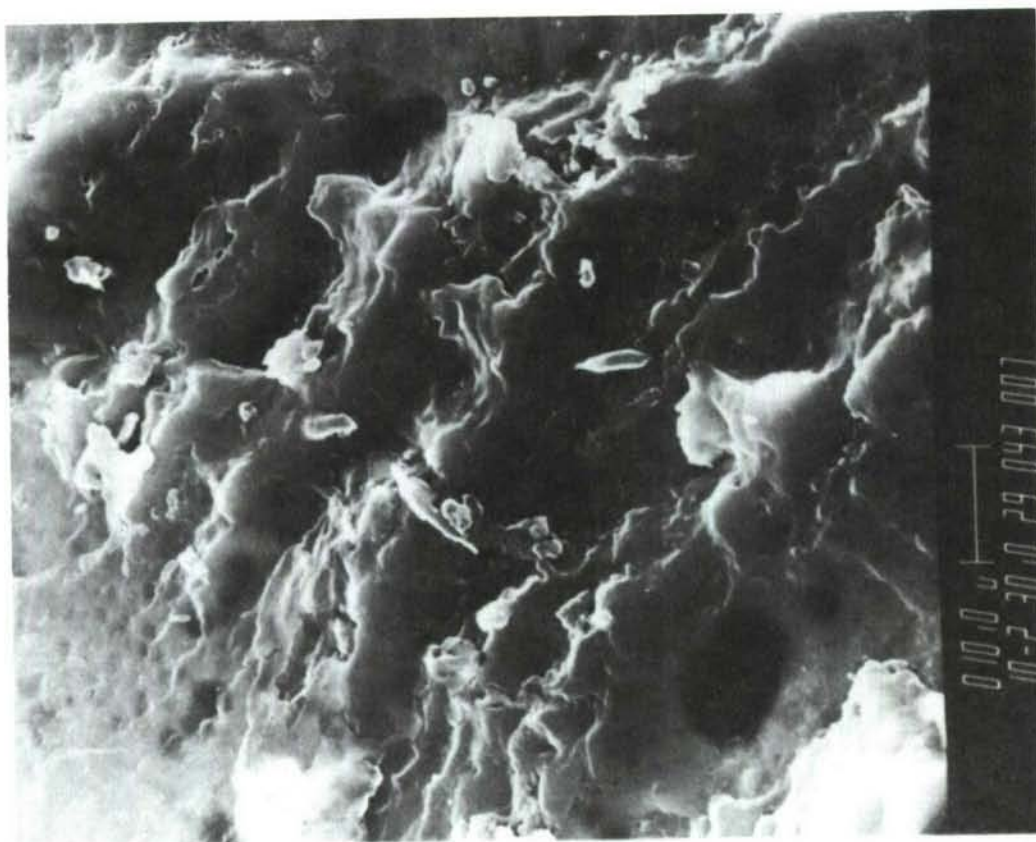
Photomicrograph of Fracture Surface (Skin Side),
